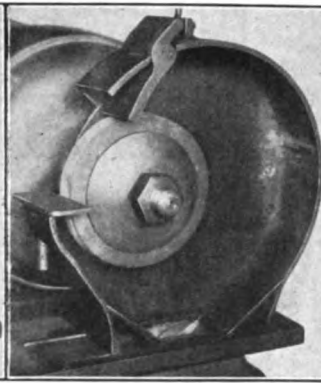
POSITION OF HOOD PARTS AS WHEEL WEARS
